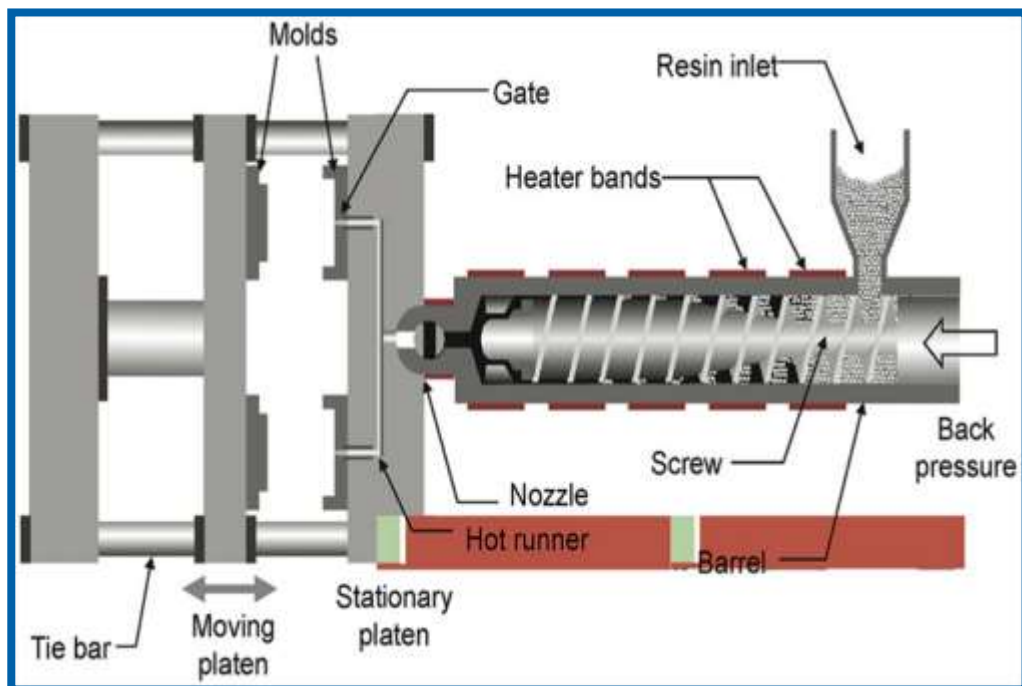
5. Major components of an injection molding machine showing the extruder and clamp units.
